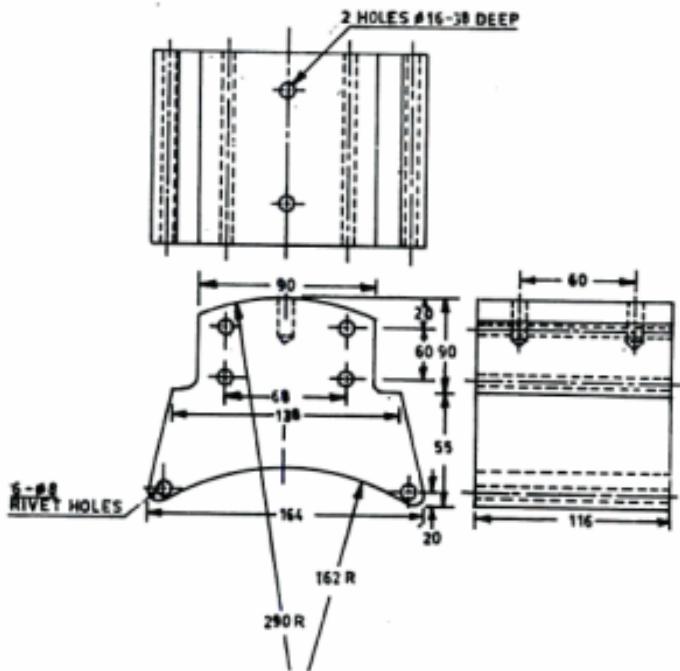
Orthographic projections of a pole of a d.c. machine
